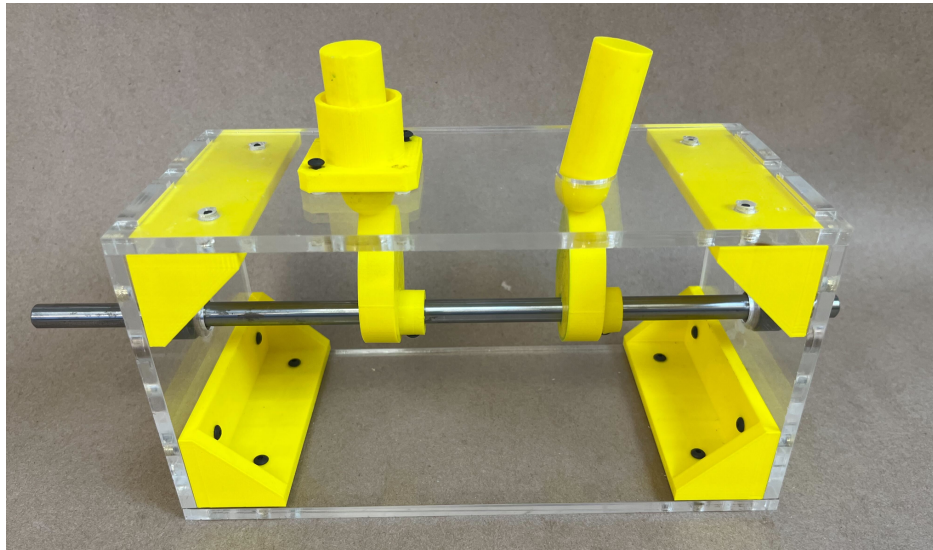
Cam-follower assembly task that is constrained properly (left) and improperly (right)
